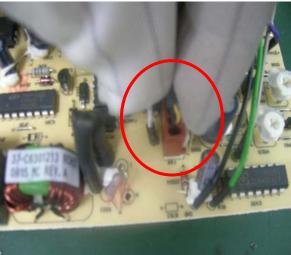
Using Soldering Iron, heat the solder of Electrolytic Capacitors
